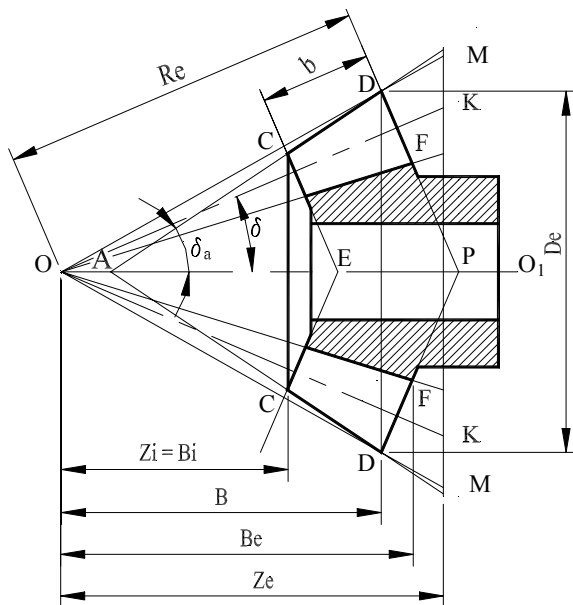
Scheme to the construction of auxiliary planes of bevel gear model
